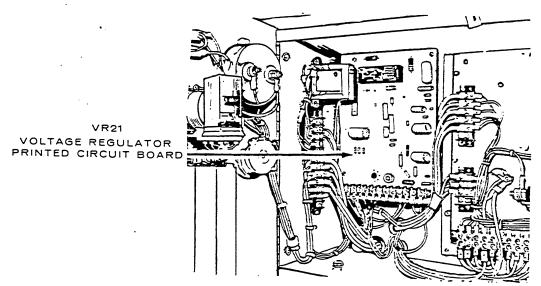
VOLTAGE REGULATOR PRINTED CIRCUIT BOARD LOCATION
